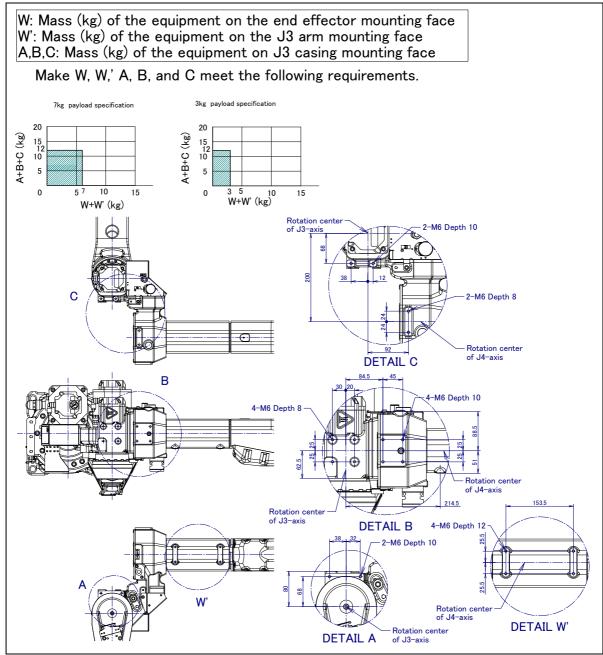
(b) Equipment mounting faces (ARC Mate 100iC/7L, M-10iA/7L)
